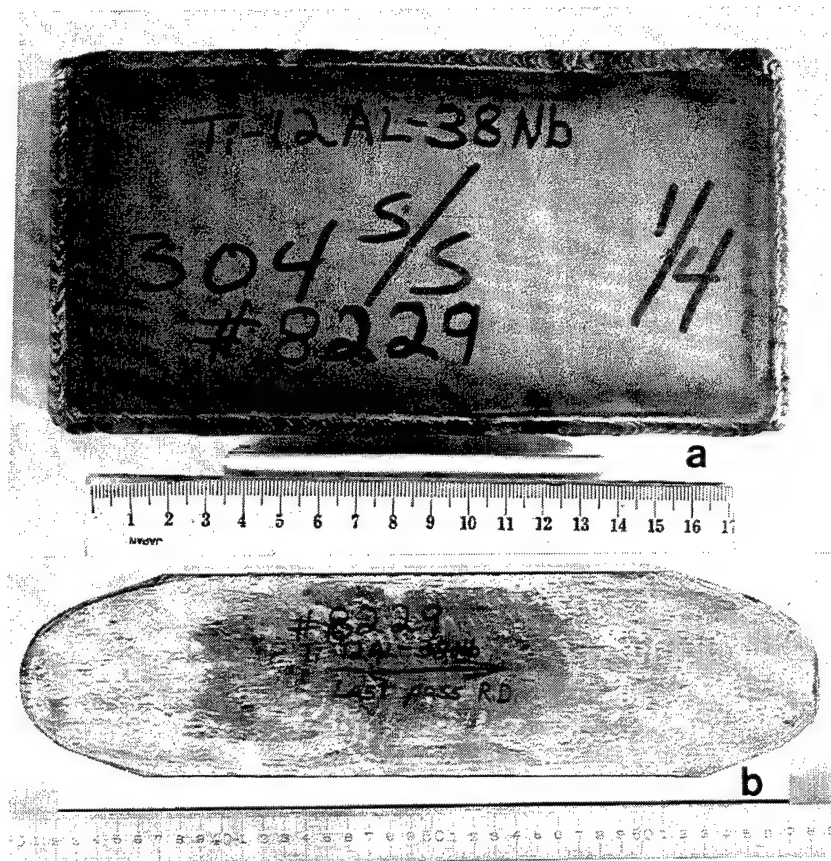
The (a) can assembly prior to rolling and the (b) extracted workpiece after rolling for Ti-12Al-38Nb.
